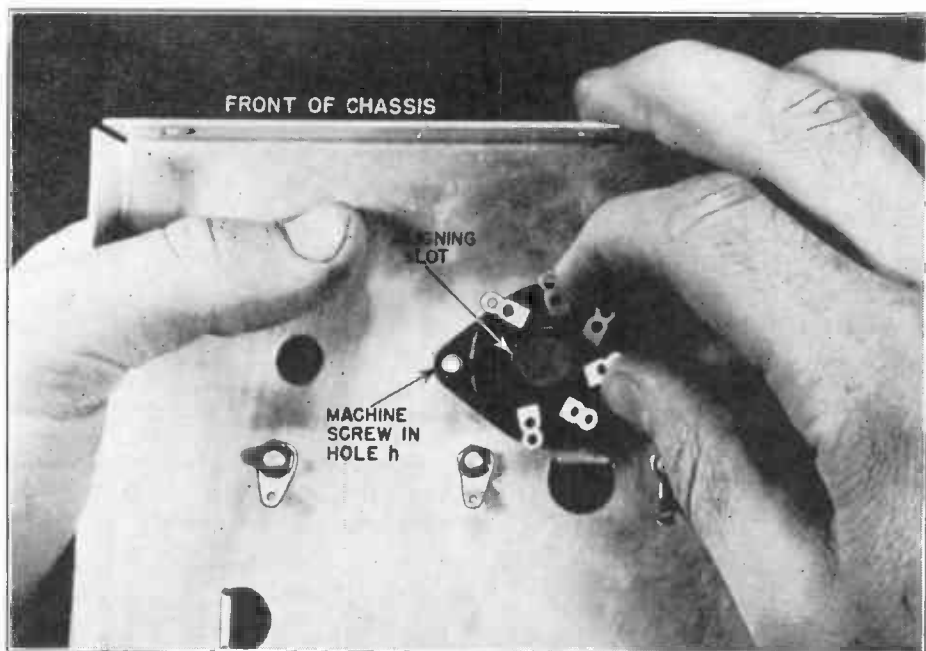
Method of mounting the tube socket on the chassis. The terminal lugs of the socket should be underneath the chassis, and the aligning slot should be at the left (near hole *h*) when the chassis is held as shown in this illustration. Hold the machine screw in position with a finger of your left hand.
